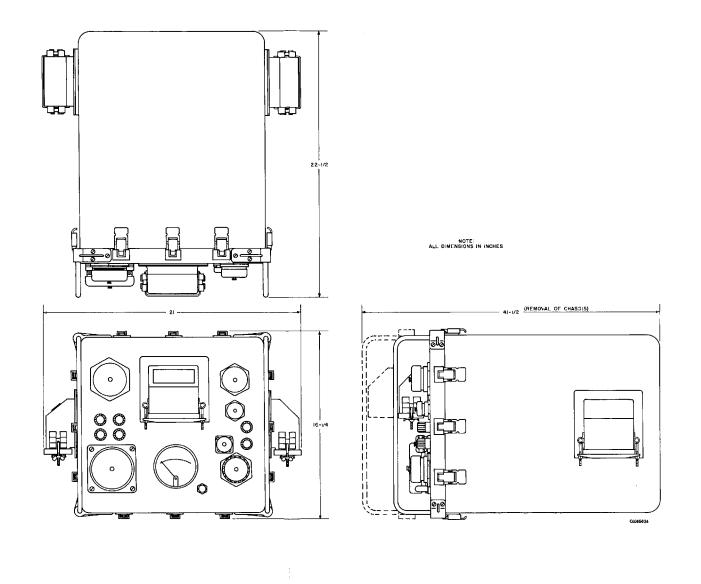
Servo Data Coordinator SN-231/TPS-25, Dimensional Drawing.
